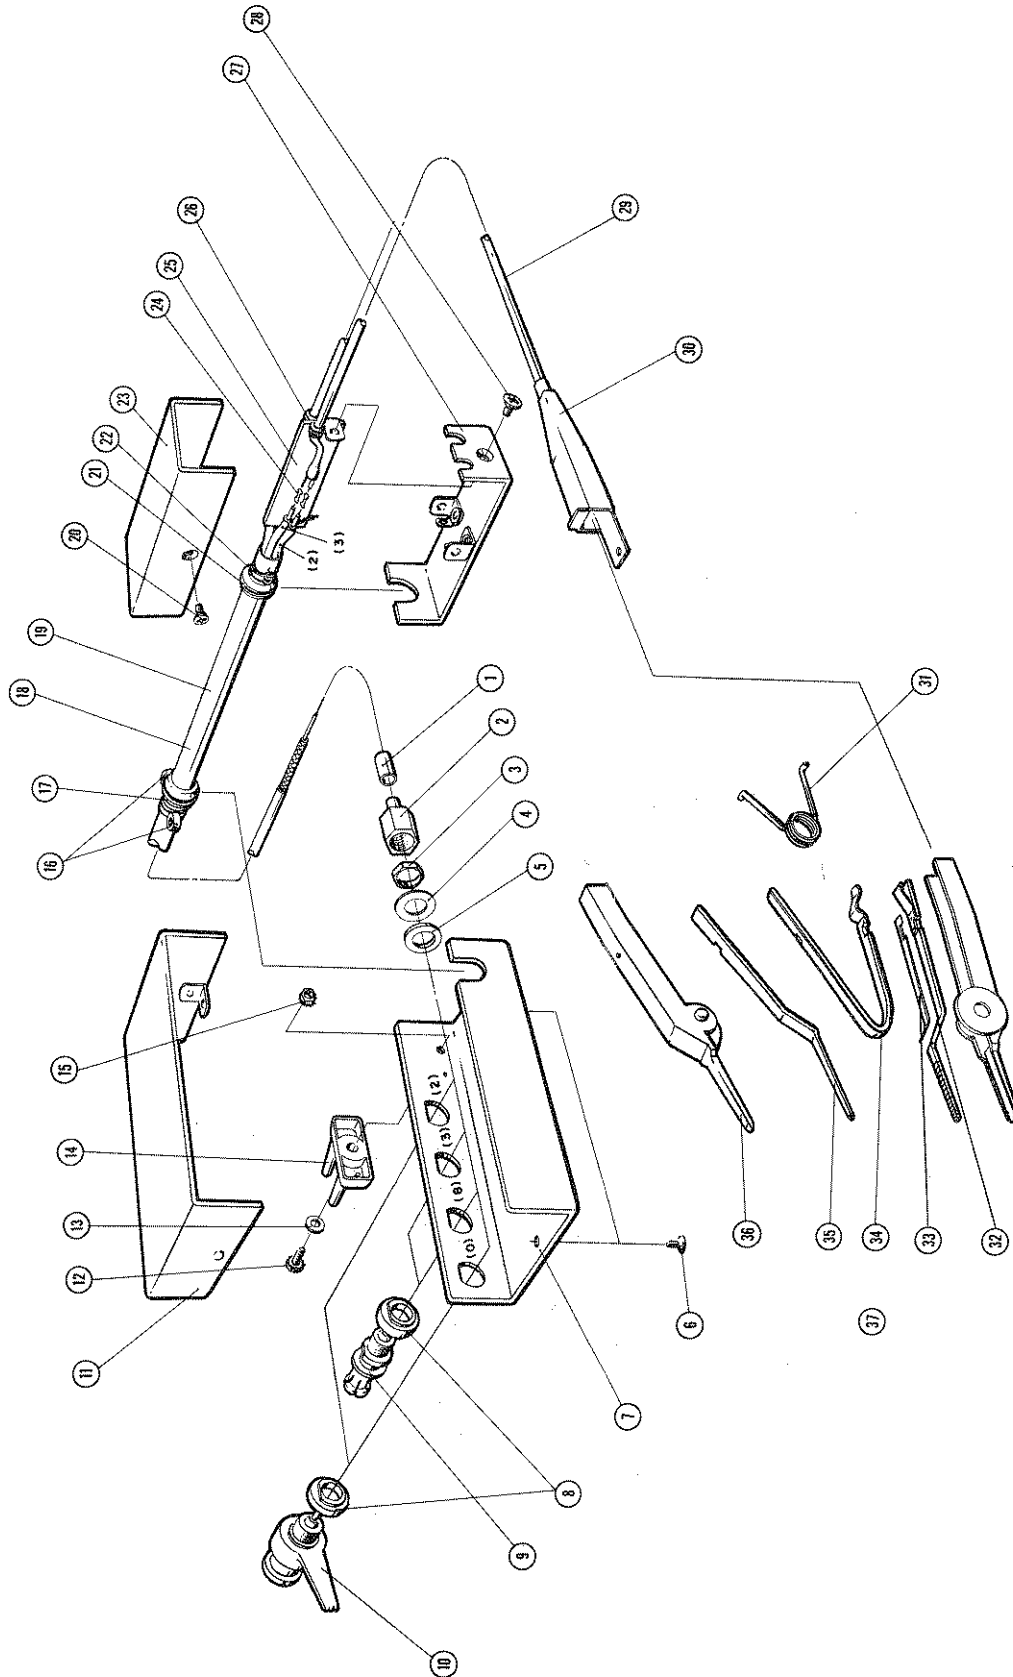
Parts Identification for 16048C (Sheet 1 of 2).
